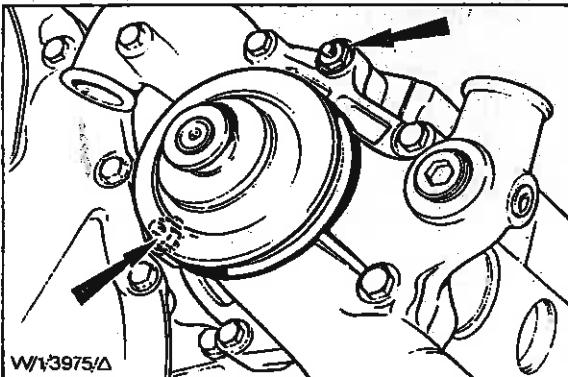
Water Pump Mounting Nuts and Bolts on 2728T Engine
